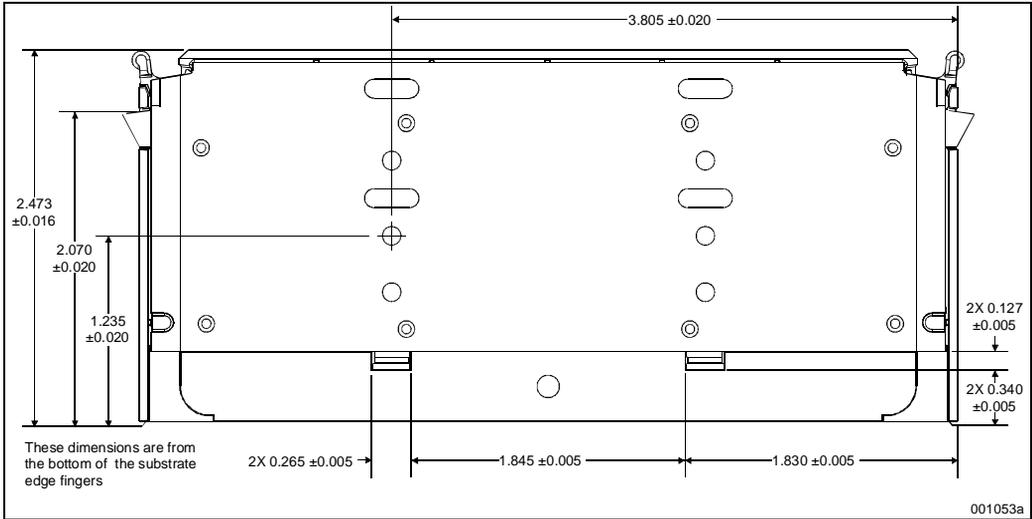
S.E.C. Cartridge Thermal Plate Side Dimensions
